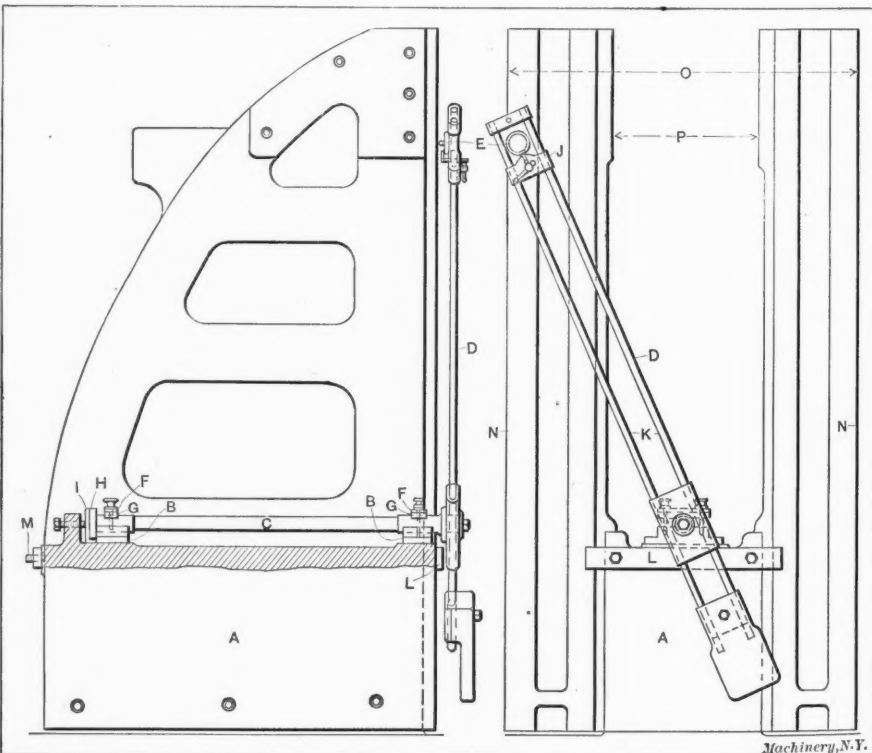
Special Fixture used for Testing Alignment of Housing Faces and provided with Sweep for Carrying Starrett Indicator
